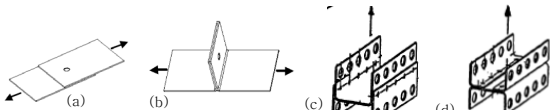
Examples of spot welded fatigue specimens types and loadings evaluated; (a) Lap shear specimen; (b) Coach peel specimen; (c) H-shaped shear specimen; (d) H-shaped peel specimen
